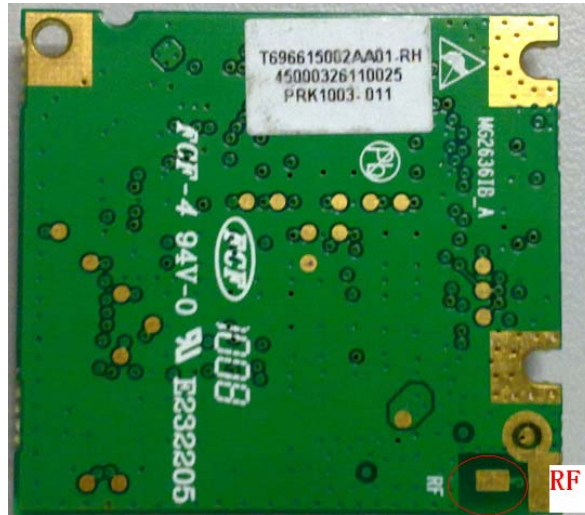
MG2636 module RF welding pad antenna
